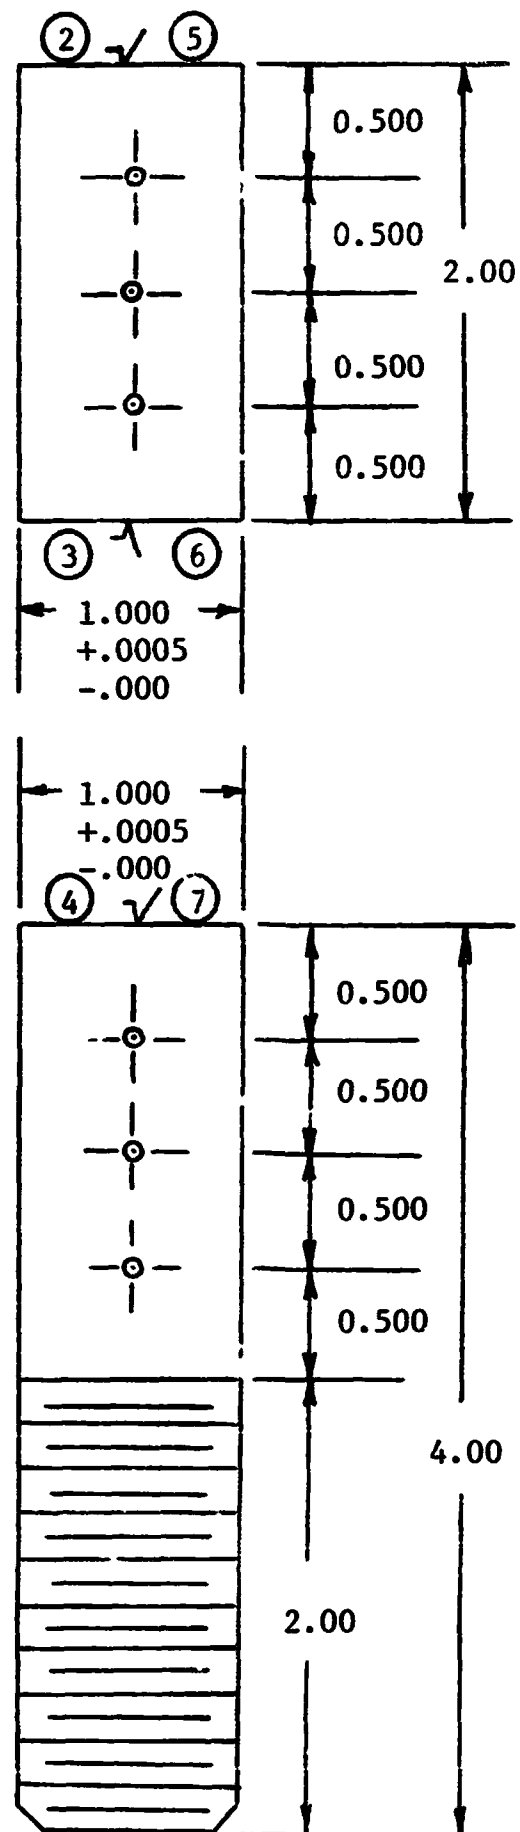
Detailed Drawing of the Center and Sink Specimens.
